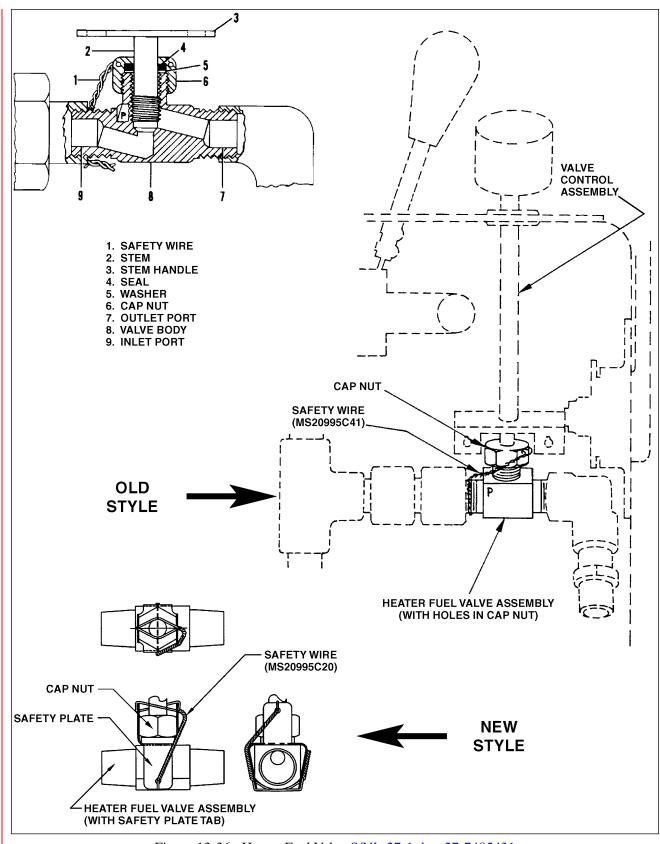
Heater Fuel Valve S/N's 27-1 thru 27-7405431
